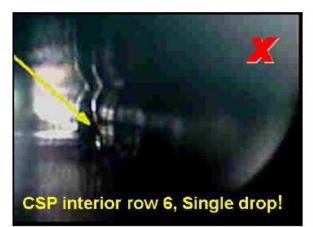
Interior Solder Joint Inspection for Flip Chip and CSP
